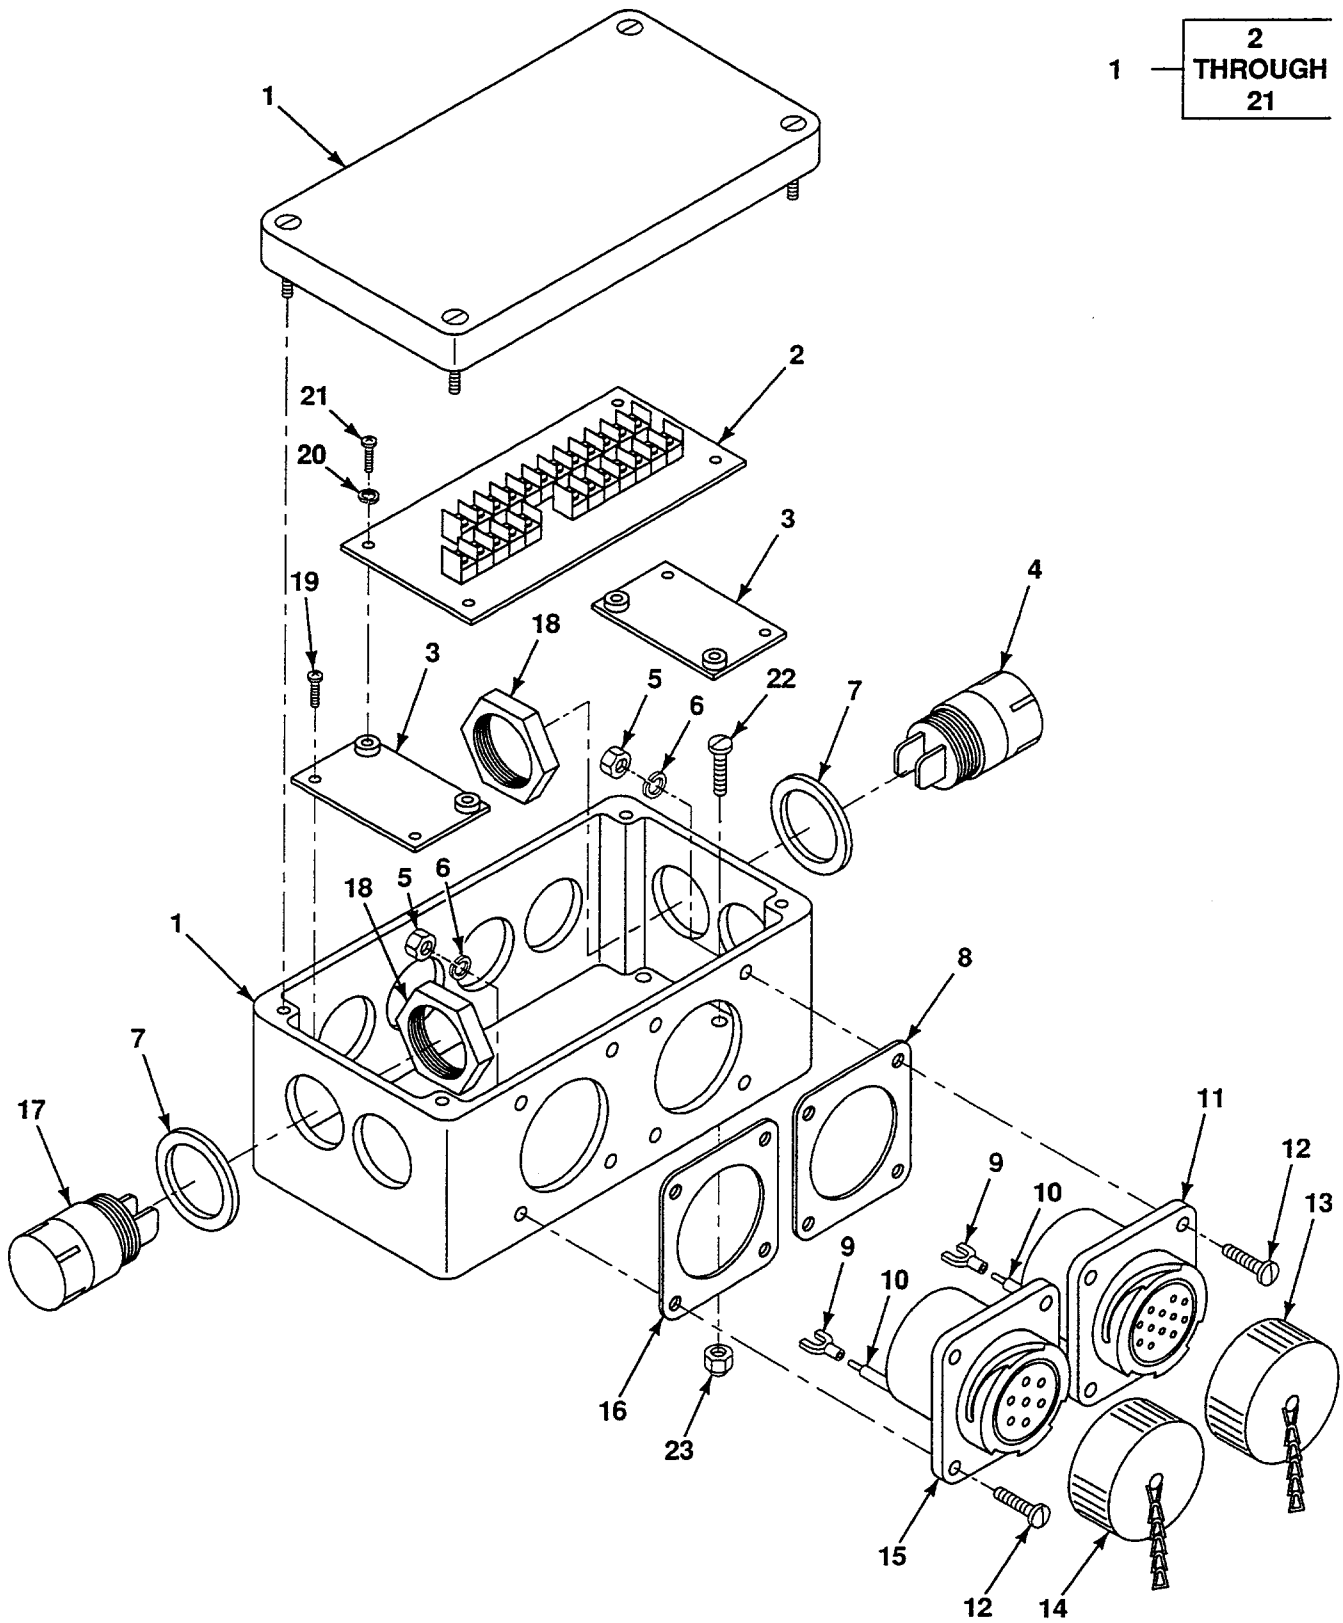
FRONT ELECTRICAL BOX ASSEMBLY
